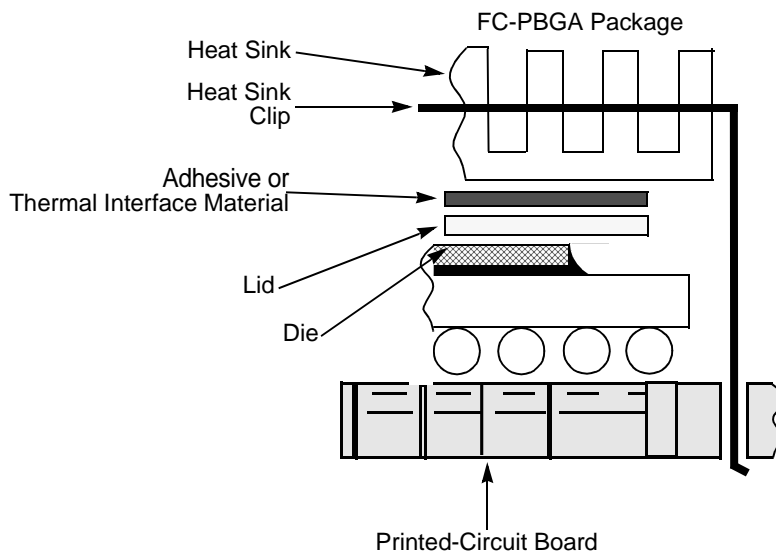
Package Exploded Cross-Sectional View with Several Heat Sink Options
